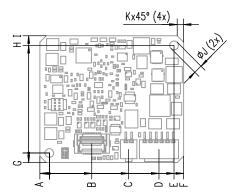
BR_XETK-S4.0 Dimensions - Top View
